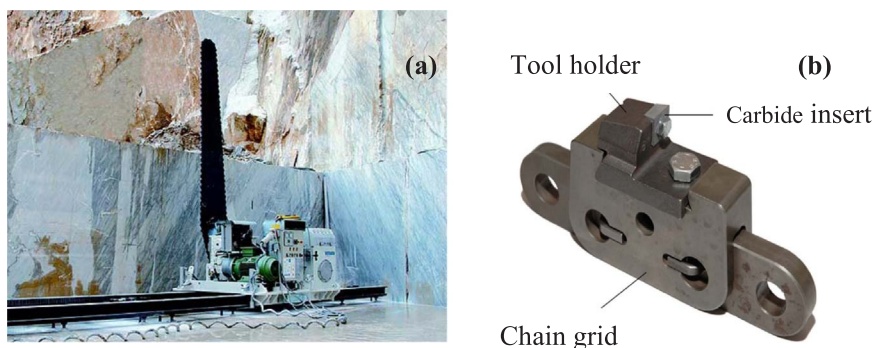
(a) Chain saw machine; (b) detail of a basilar element of the chain.
